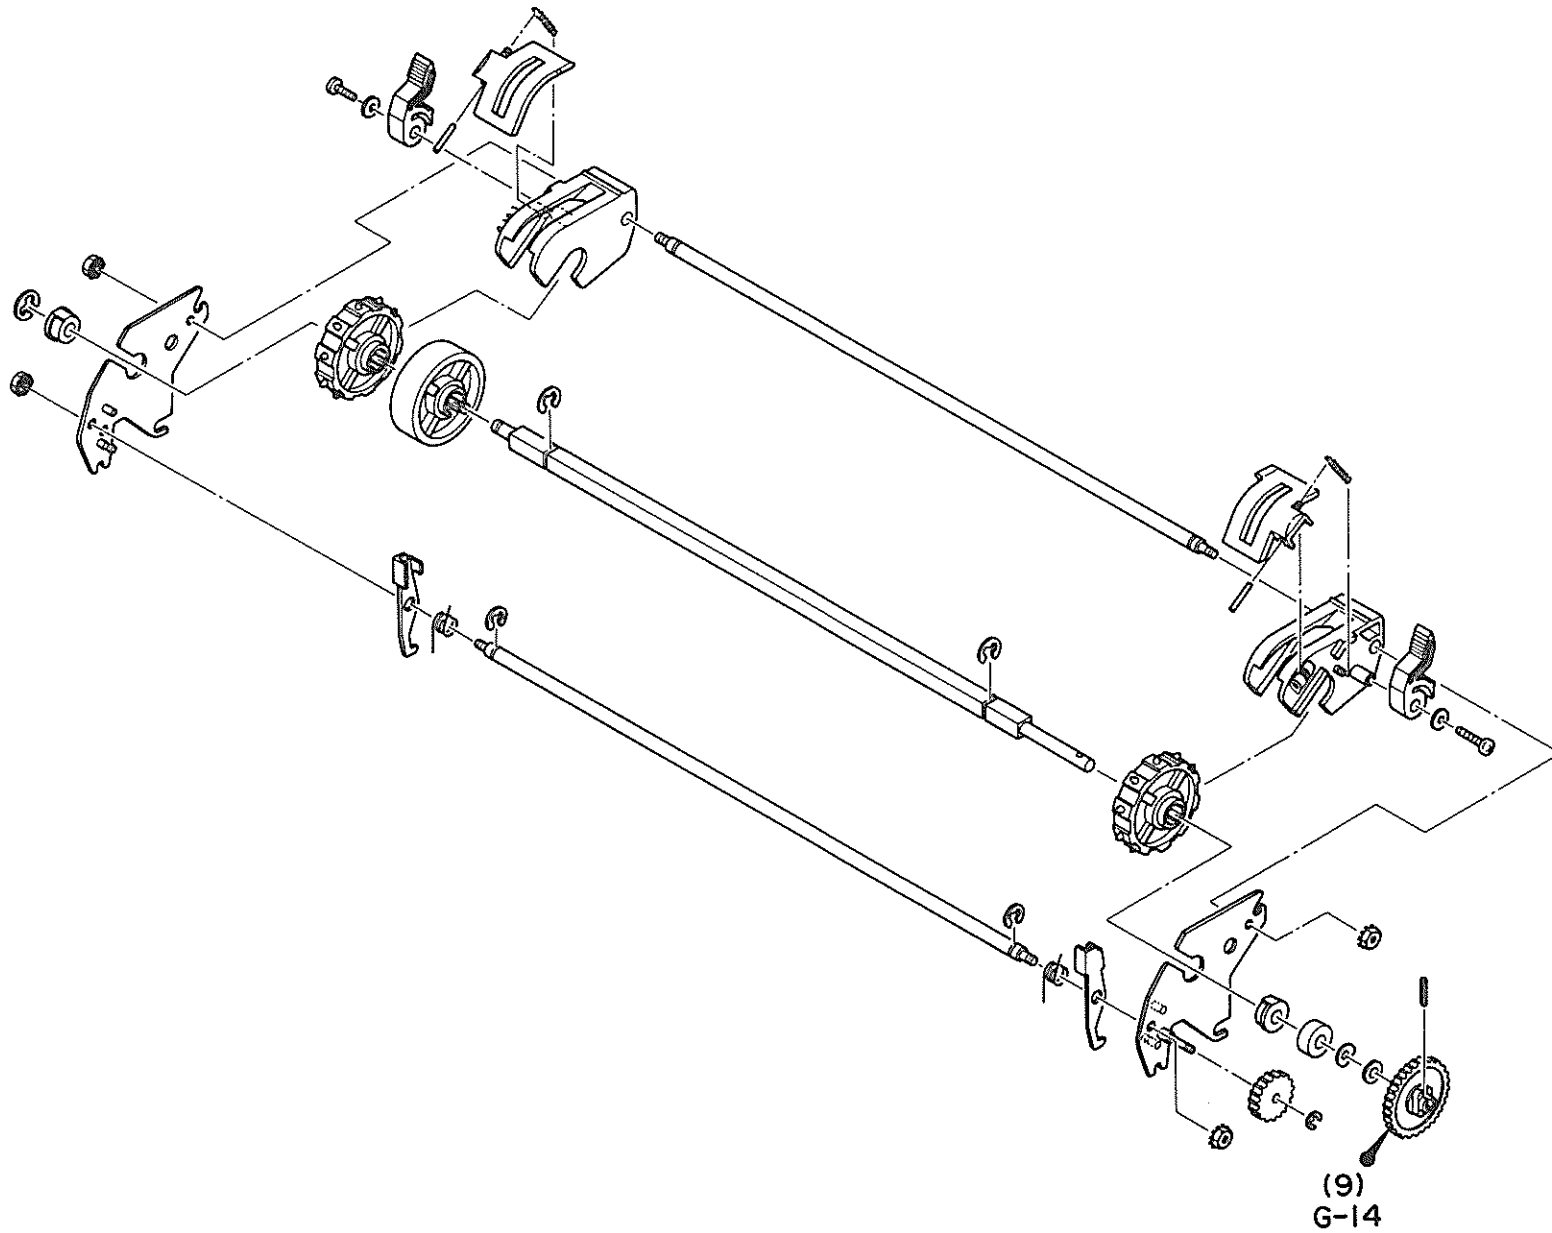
Model-3510 Lubrication and Adhesive Application Points Drawing 3
